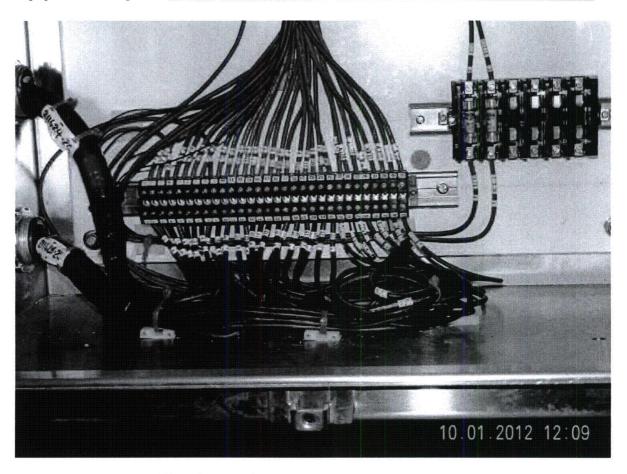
, Close-Up of Termination Strips on Panel's Back Mounting Plate
